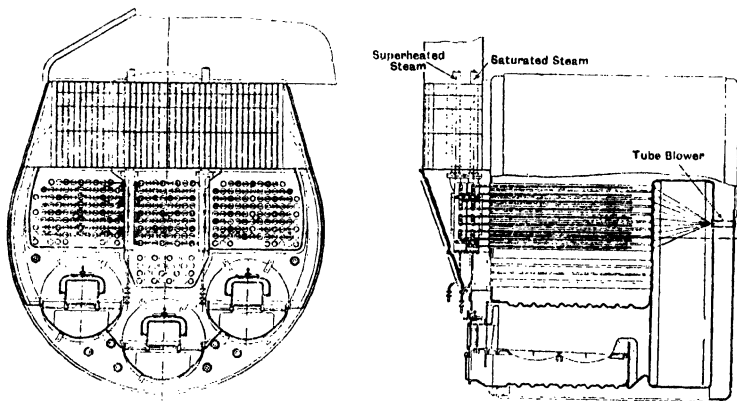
Three-Furnace Boiler, Forced Draught, with Smoke-tube Superheater.
